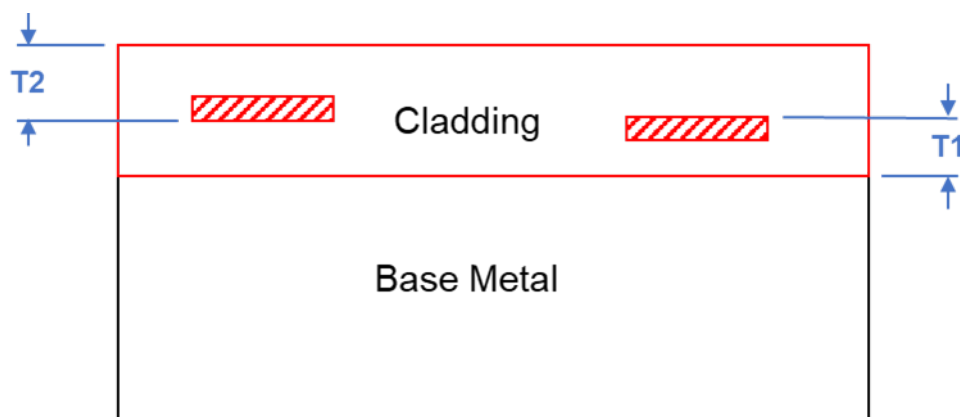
Weld Overlay Chemical Analysis
